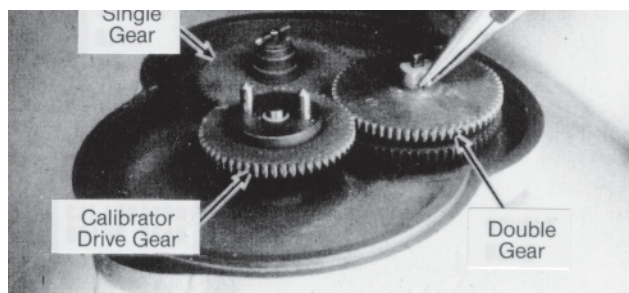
Removing Cotter Pin From Pinion Gear Assem-
